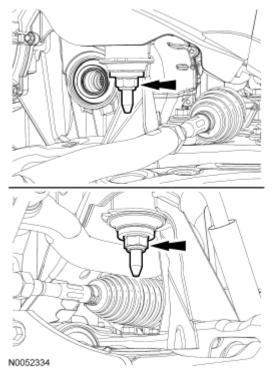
Locating Middle Subframe Nuts Courtesy of FORD MOTOR CO.
